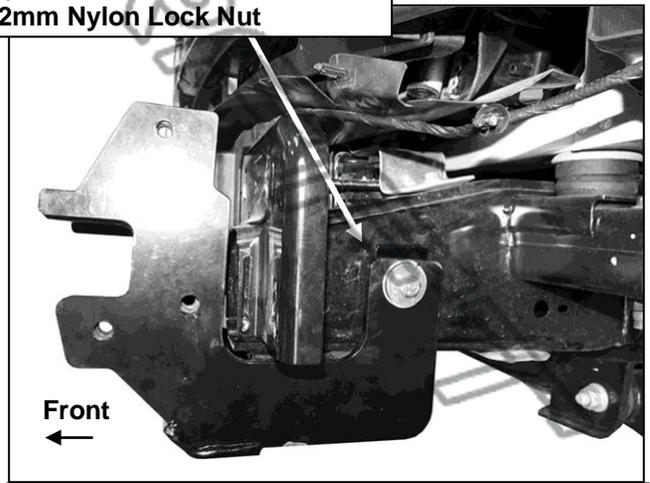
Attach Support Bracket to top of Bracket Assembly and factory tow hook (if equipped)
